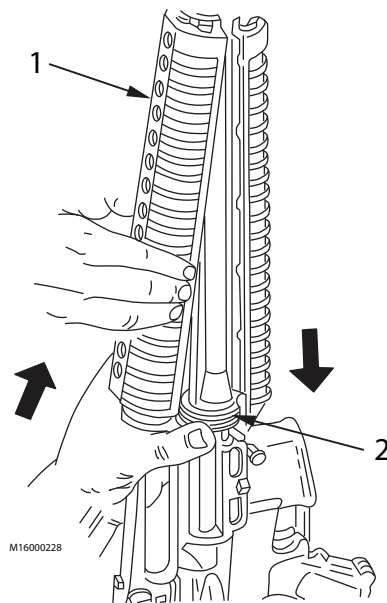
Removal of Upper Handguard Assembly (M16A2).
